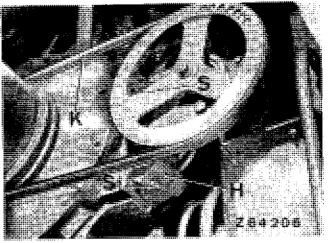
Removal of Hydraulic Pump (955 Shown)
